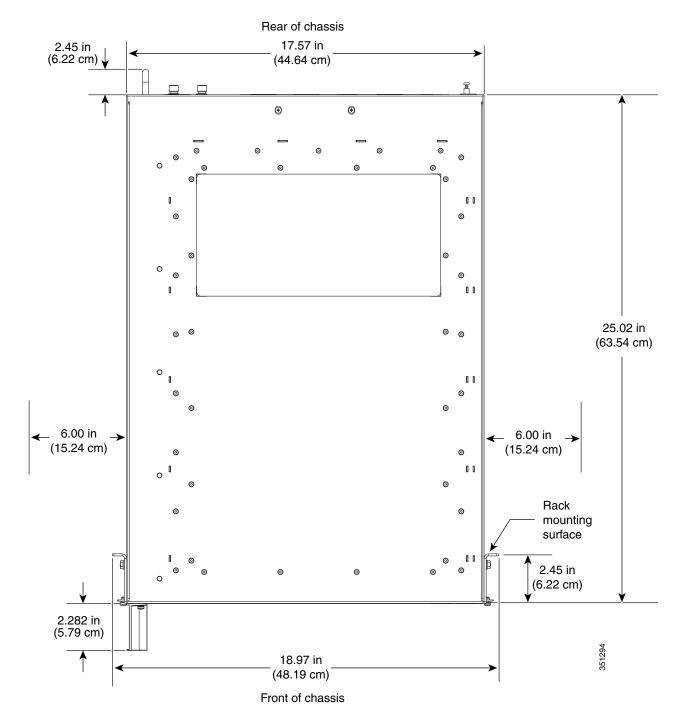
Cisco ASR 9904 Router Chassis Footprint and Dimensions—Top-Down View
